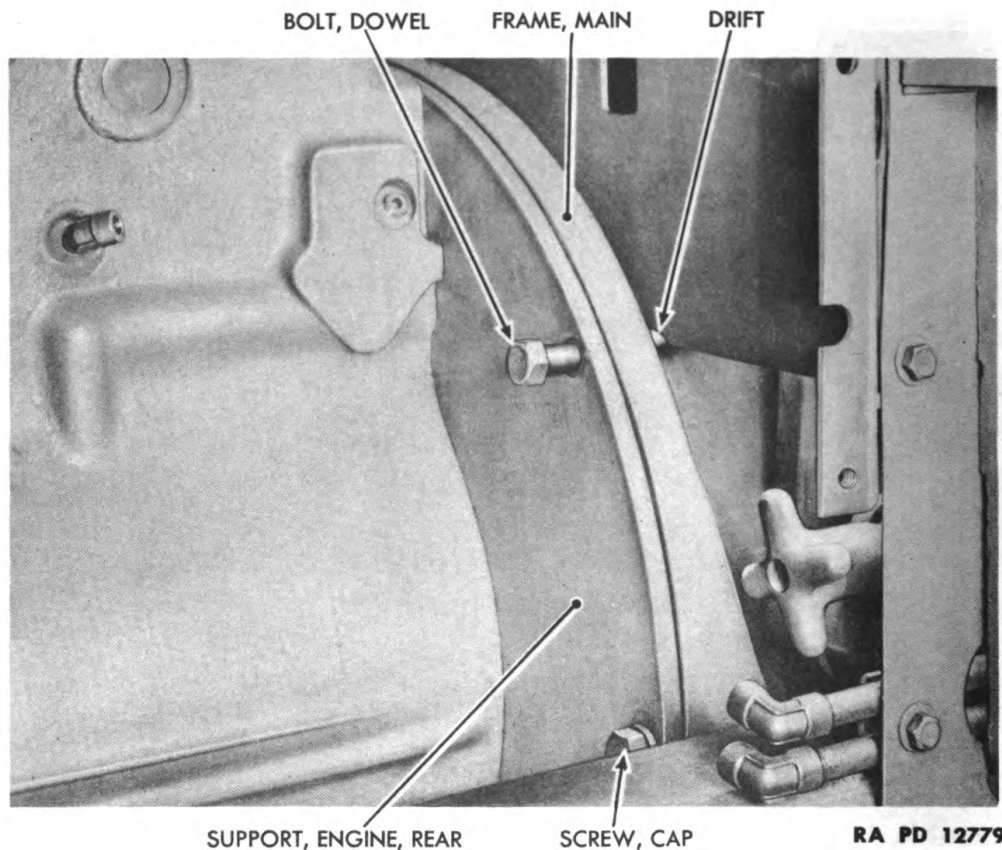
Removal of Dowel Bolt from Rear Engine Support
